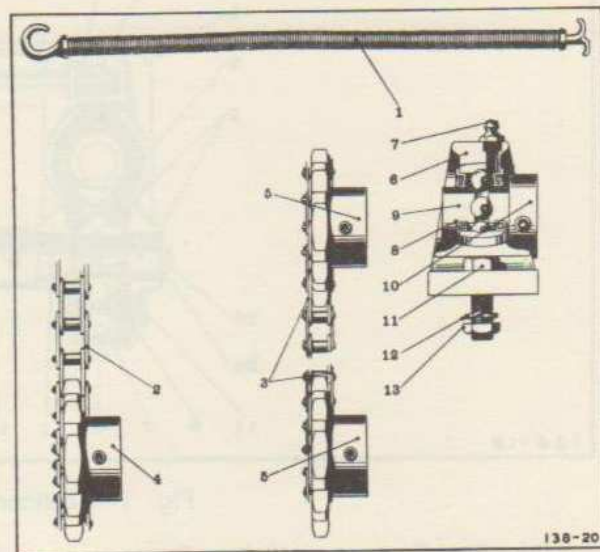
View Showing Line Holder, Sprockets, Chain and Propeller Shaft Bearing
